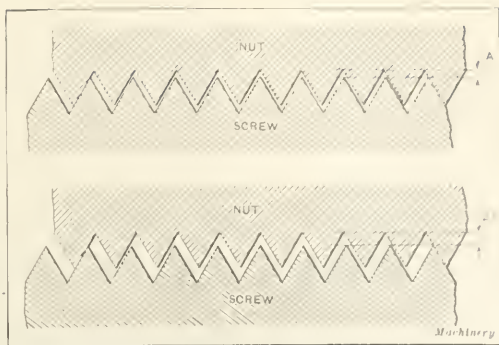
Upper Illustration shows Condition when Lead of Thread in Nut is Correct and Lead of Screw Thread is Inaccurate; Lower Illustration shows Condition when Lead of Thread in Both Nut and Screw is Inaccurate, with the Errors in Opposite Directions
